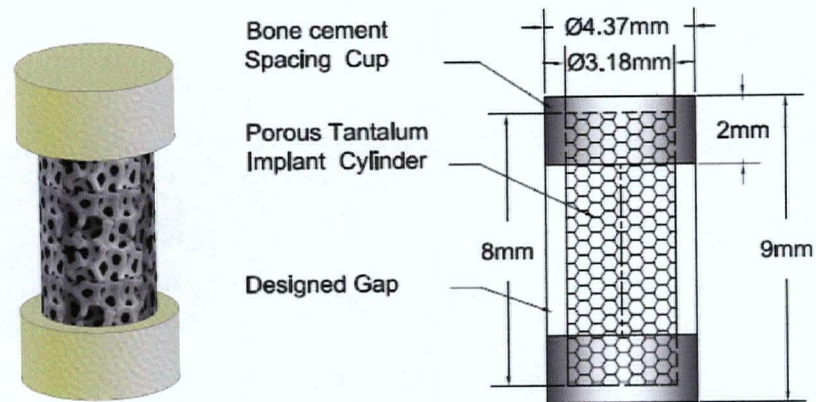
Mechanical drawings of porous tantalum implant assembly. The left is a 3D drawing of the implant assembly, and the right is a 2-D drawing with all the dimensions
